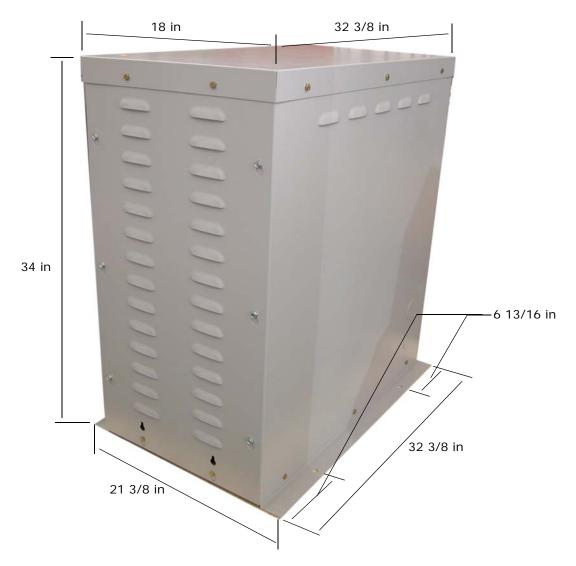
6 kVA UPS Chassis and Mounting Dimensions
